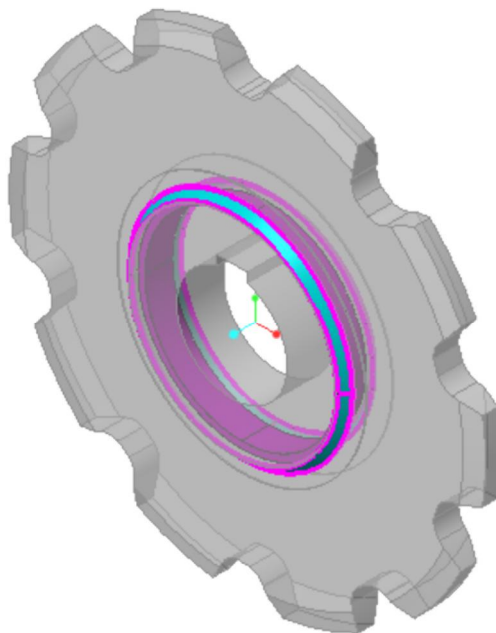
Weld surface shown in Cyan and bonded surface shown in purple.
